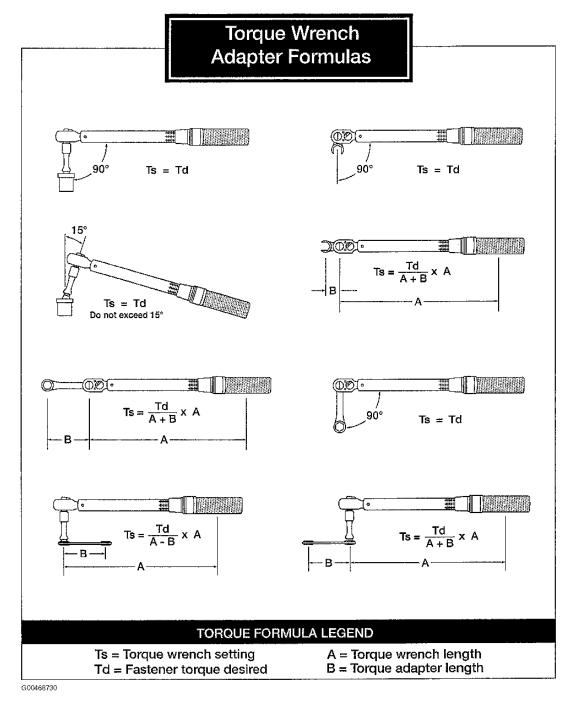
Identifying Torque Wrench Adapter Formulas Courtesy of FORD MOTOR CO.
